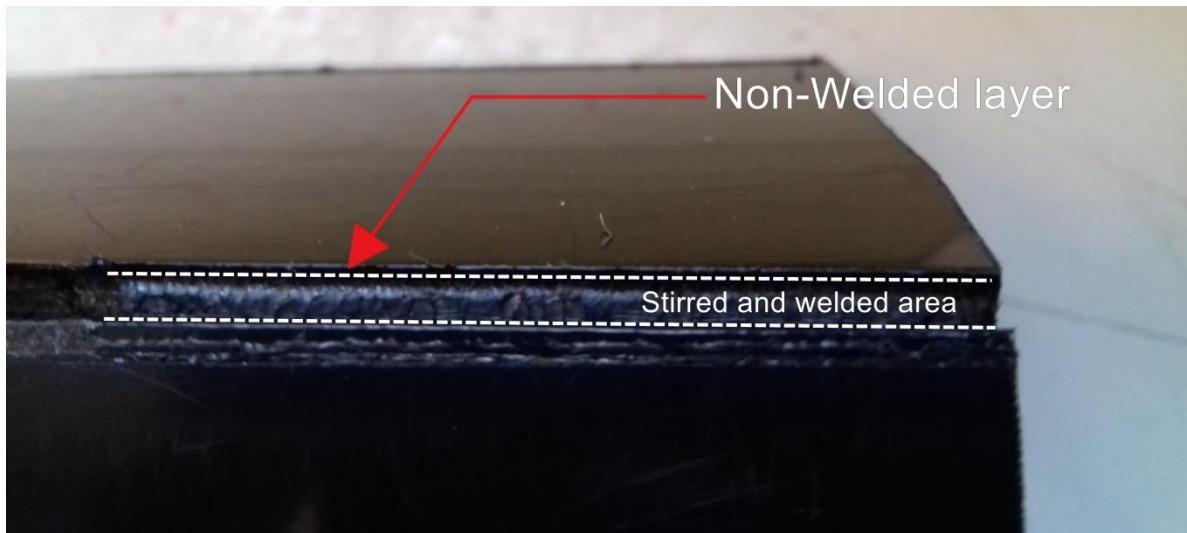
Root defect due to lack of tool penetration. Pre-test weld with 2.8 mm probe length.
